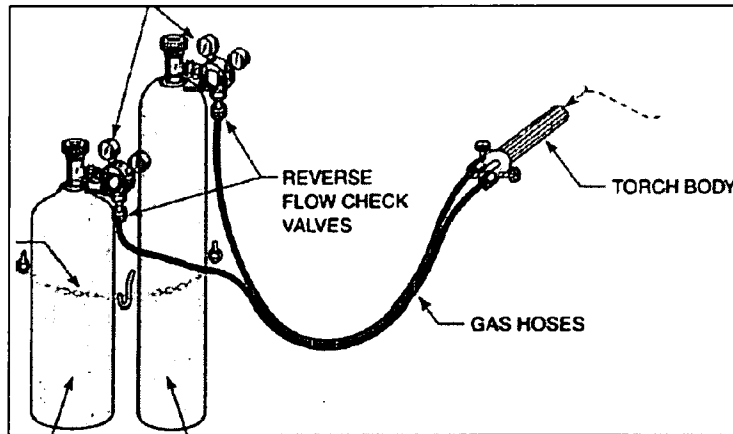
Oxy-fuel Welding and Cutting Equipment [ 1 ]
